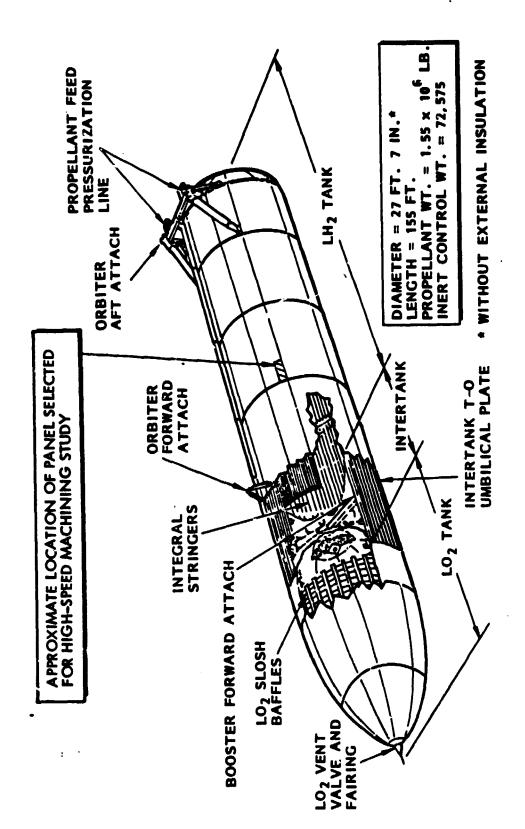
Detail of Space Shuttle External Fuel Tank
